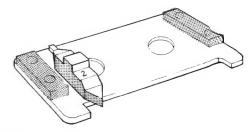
Tandberg Adjustment Plate with Tool No. 2 Fig. 4.8.1 Positioning Tool No. 4 90° A CAPSTAN PINCH ROLLER SHAFT
